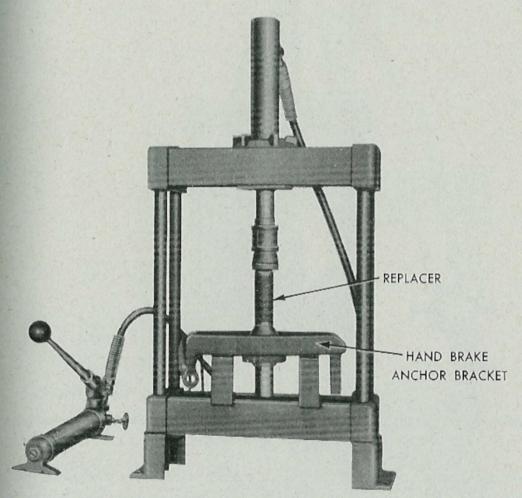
Pressing Oil Seal in Bearing Cap with Replacer 41-R-2390-600
